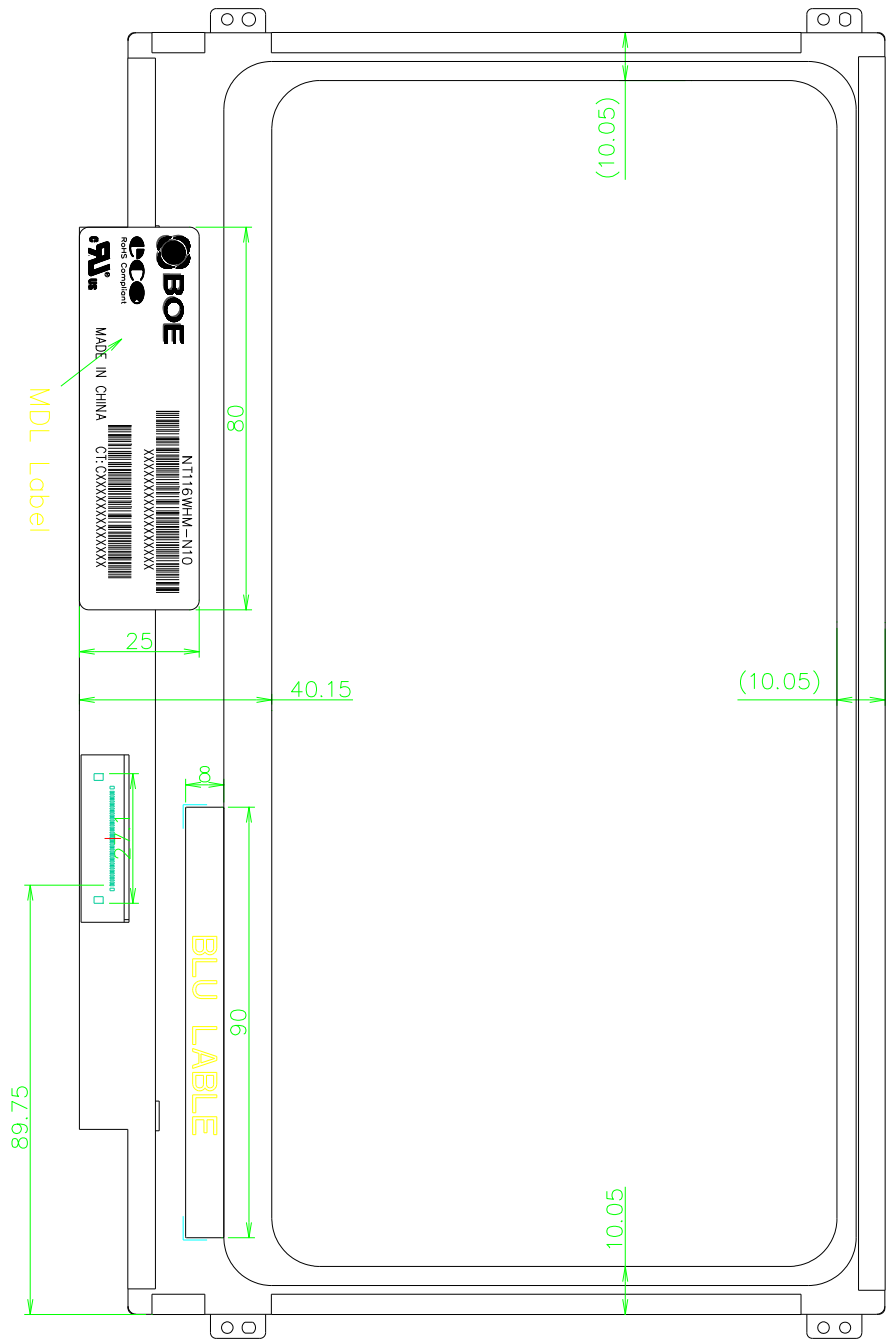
TFT-LCD Module Outline Dimensions (Rear view)
